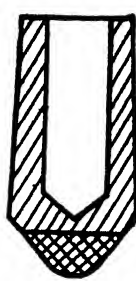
ELECTRODE WITH COPPER TUNGSTEN TIP SOLDERED
